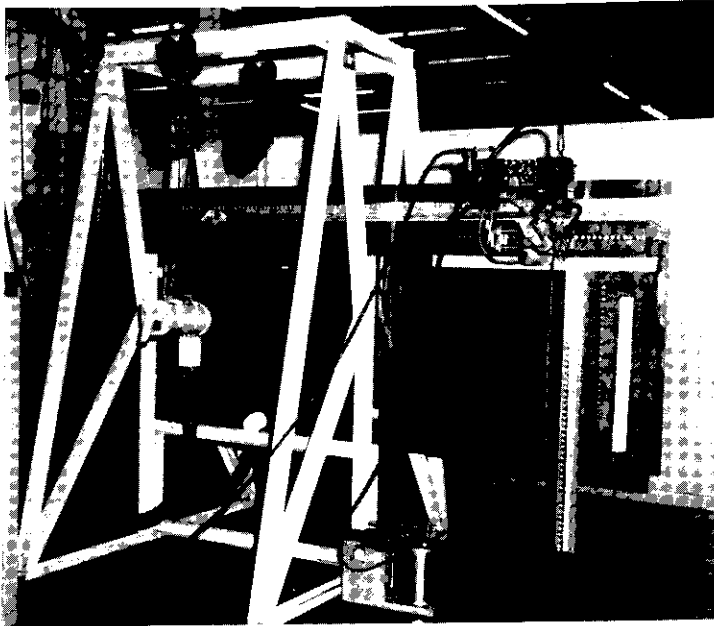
BOEING ELECTROMAGNETIC RIVETER AND OMARK-WINSLOW TRACK DRILL
